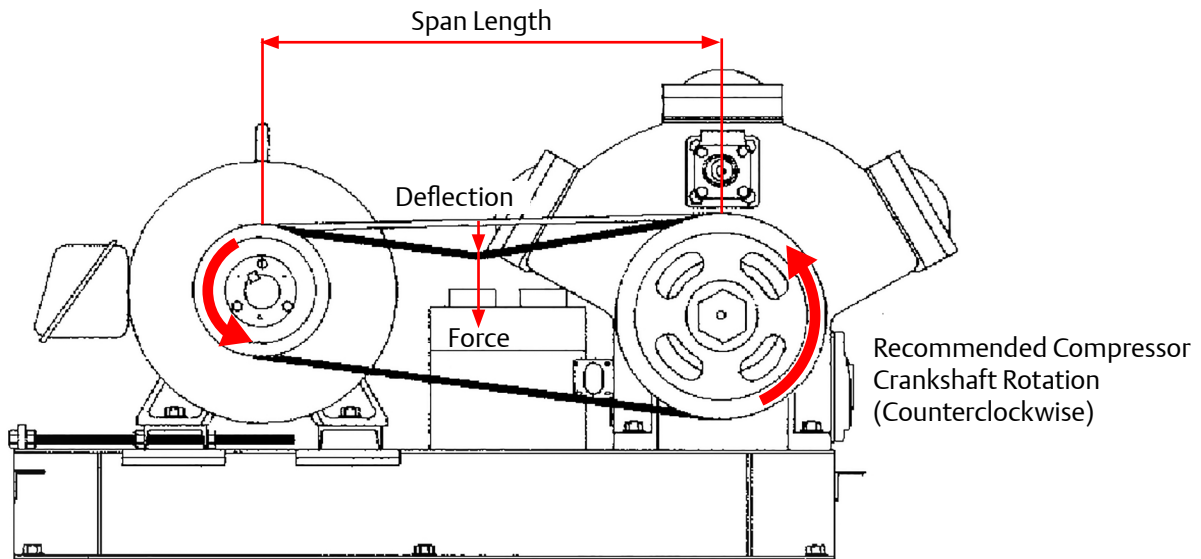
Recommended Compressor Crankshaft Rotation (Unit)
